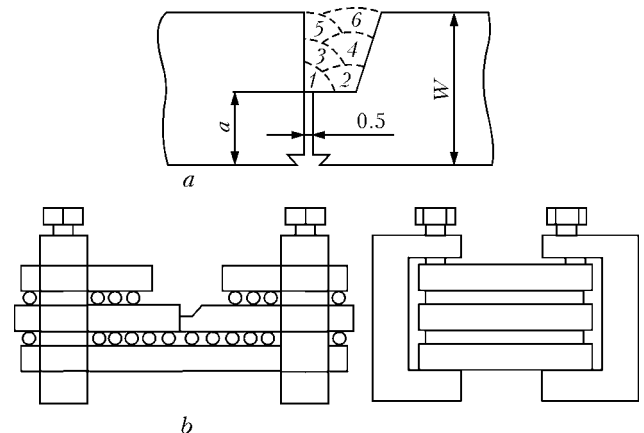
Schematics of welded specimen with IRFP in edge (*a*) and device for its welding (*b*): 1–6 – groove filling sequence
